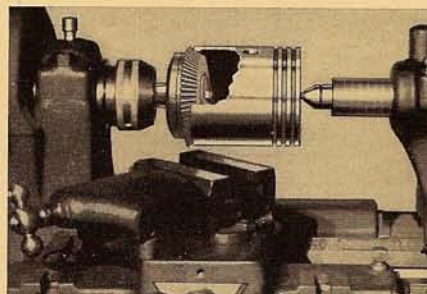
Reaming the Skirt of a Piston. Reamer is Held on Piston Adapter Shank.
